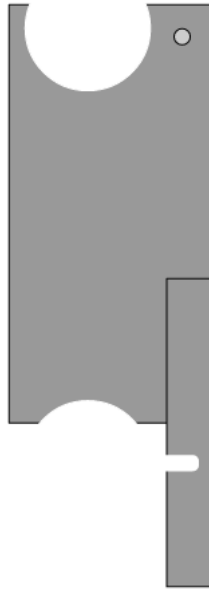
Schematic of a typical middle spacer in front view. This design includes straight latches with slots in the lower right corner and a rod in the upper right corner.
